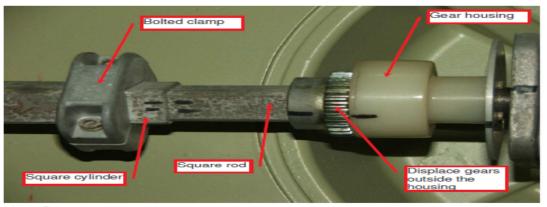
View of the coupling between the cylinder shaft, rod and displaced gears at the back of the rod
